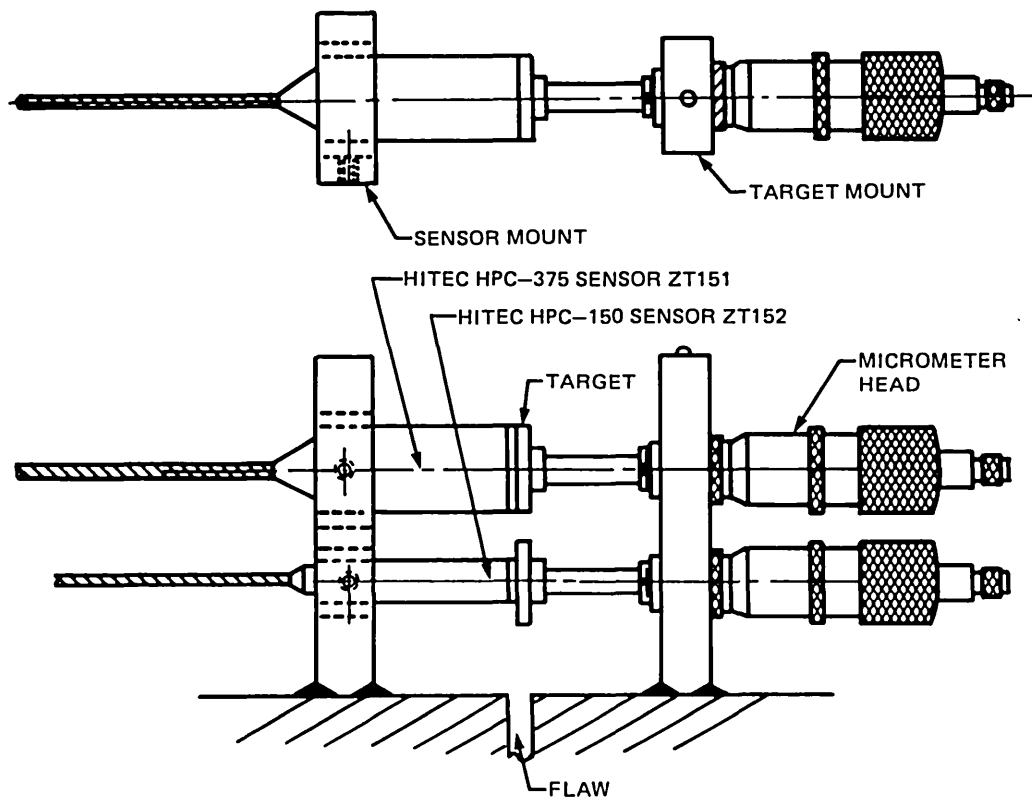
CMOD sensor assembly for ZT151 and ZT152. The mounts for ZT150 and ZT153 were similar.
